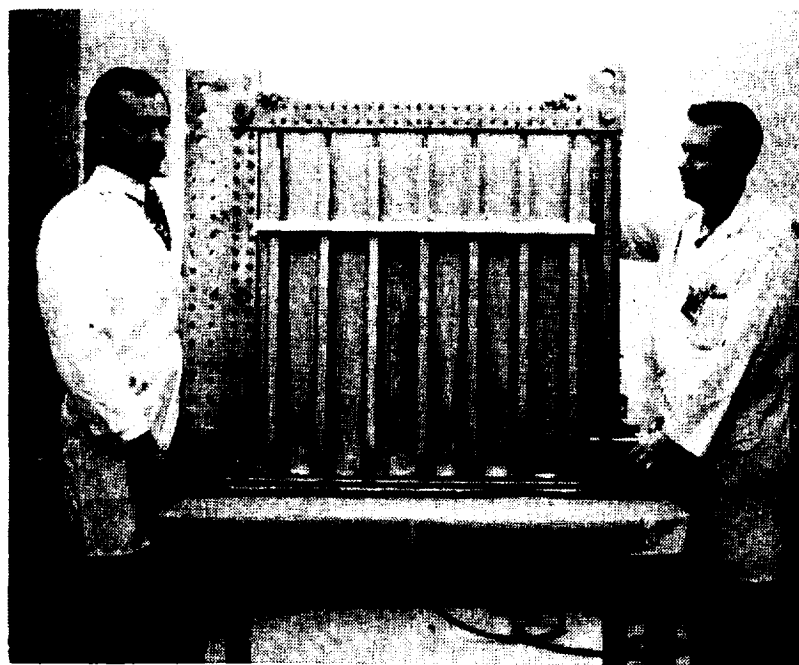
Frame Side of Completed Shear Beam and Test Fixture Assembly (129951B)
